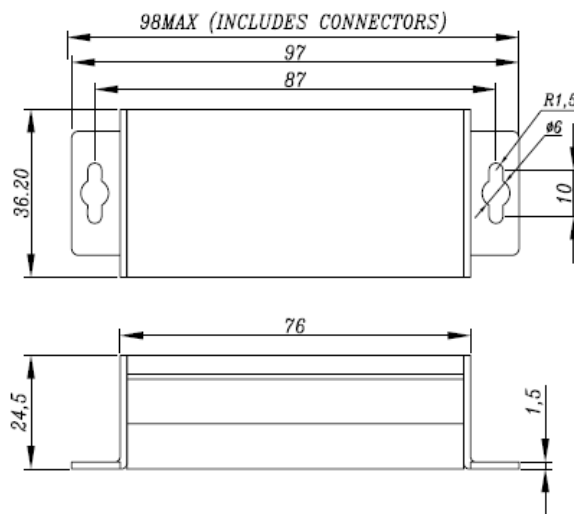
Dimensional drawings of ET1100C (mm)
